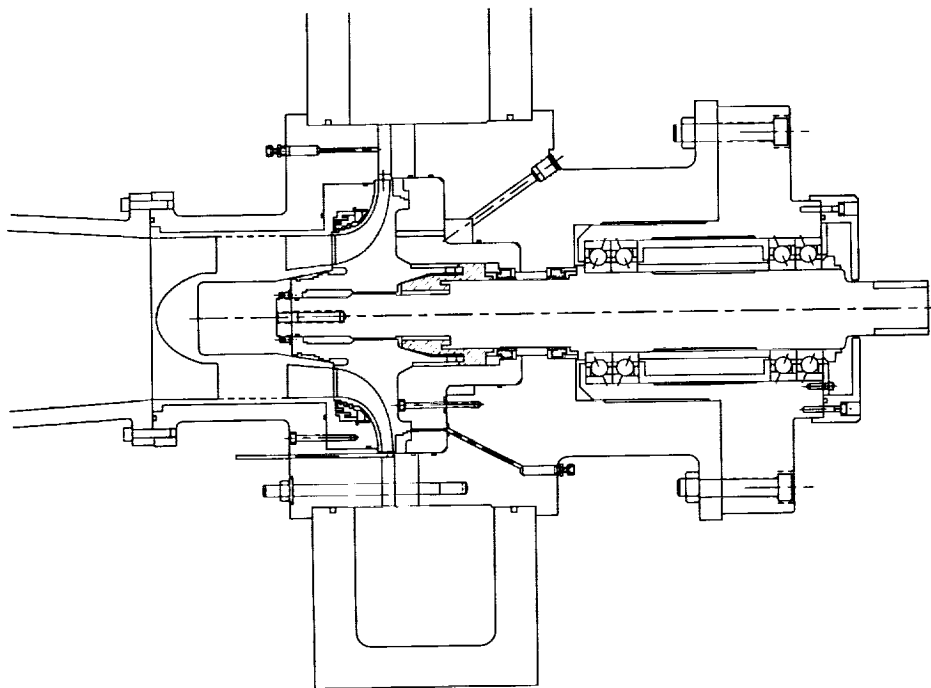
Cutaway view of the unshrouded impeller technology water flow rig.
